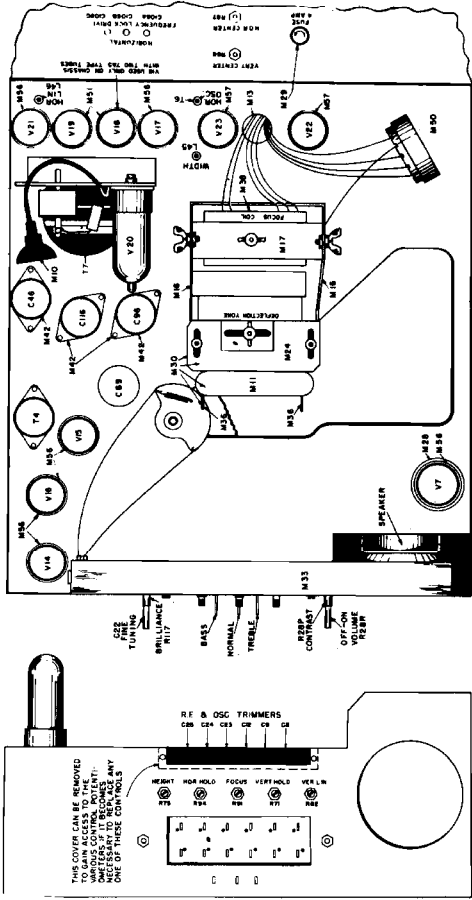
COMPONENT DIAGRAM - TOP VIEW OF MAIN CHASSIS
